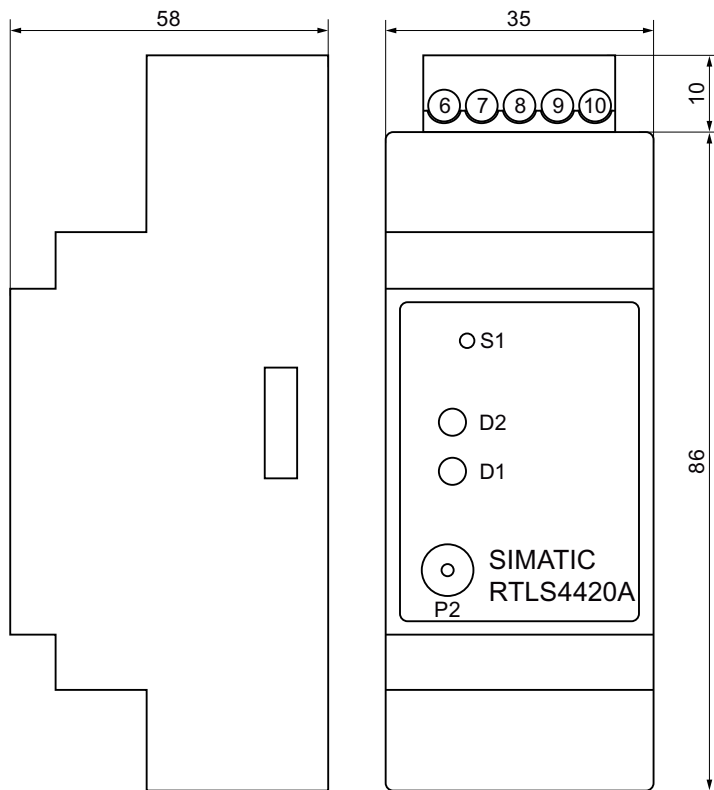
Dimension drawing SIMATIC RTLS4420A - All dimensions specified in millimeters
